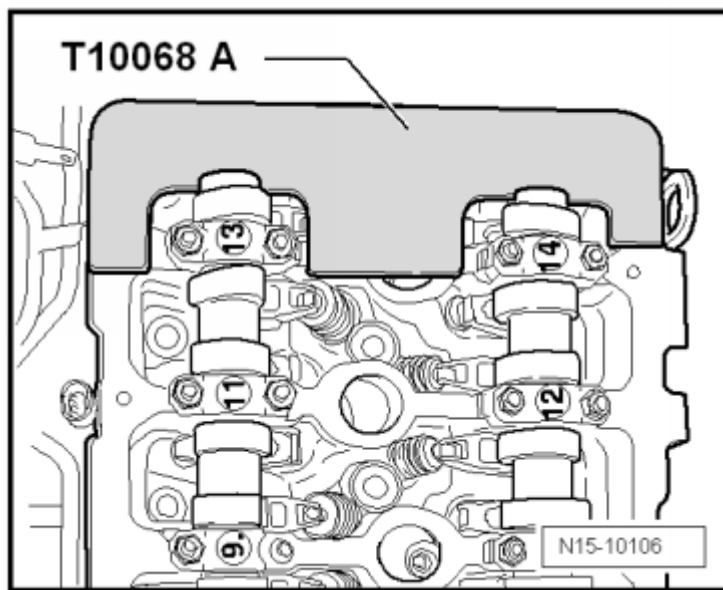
Identifying Camshaft Bar T10068 A Engage In Shaft Grooves
